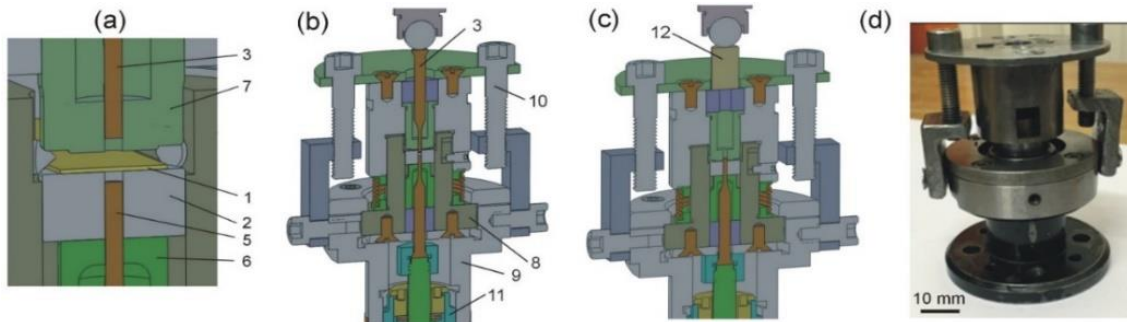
Micro die-set: (a) close up of tools; (b) set-up for micro-blanking; (c) set-up for MC; (d) overview; Main parts: 1 - strip, 2- die, 3- punch, 5- lower punch, 6- lower slide, 7- upper slide. 8- die-set, 9- base, 10- binding screw, 11- base guide, 12- pusher.
